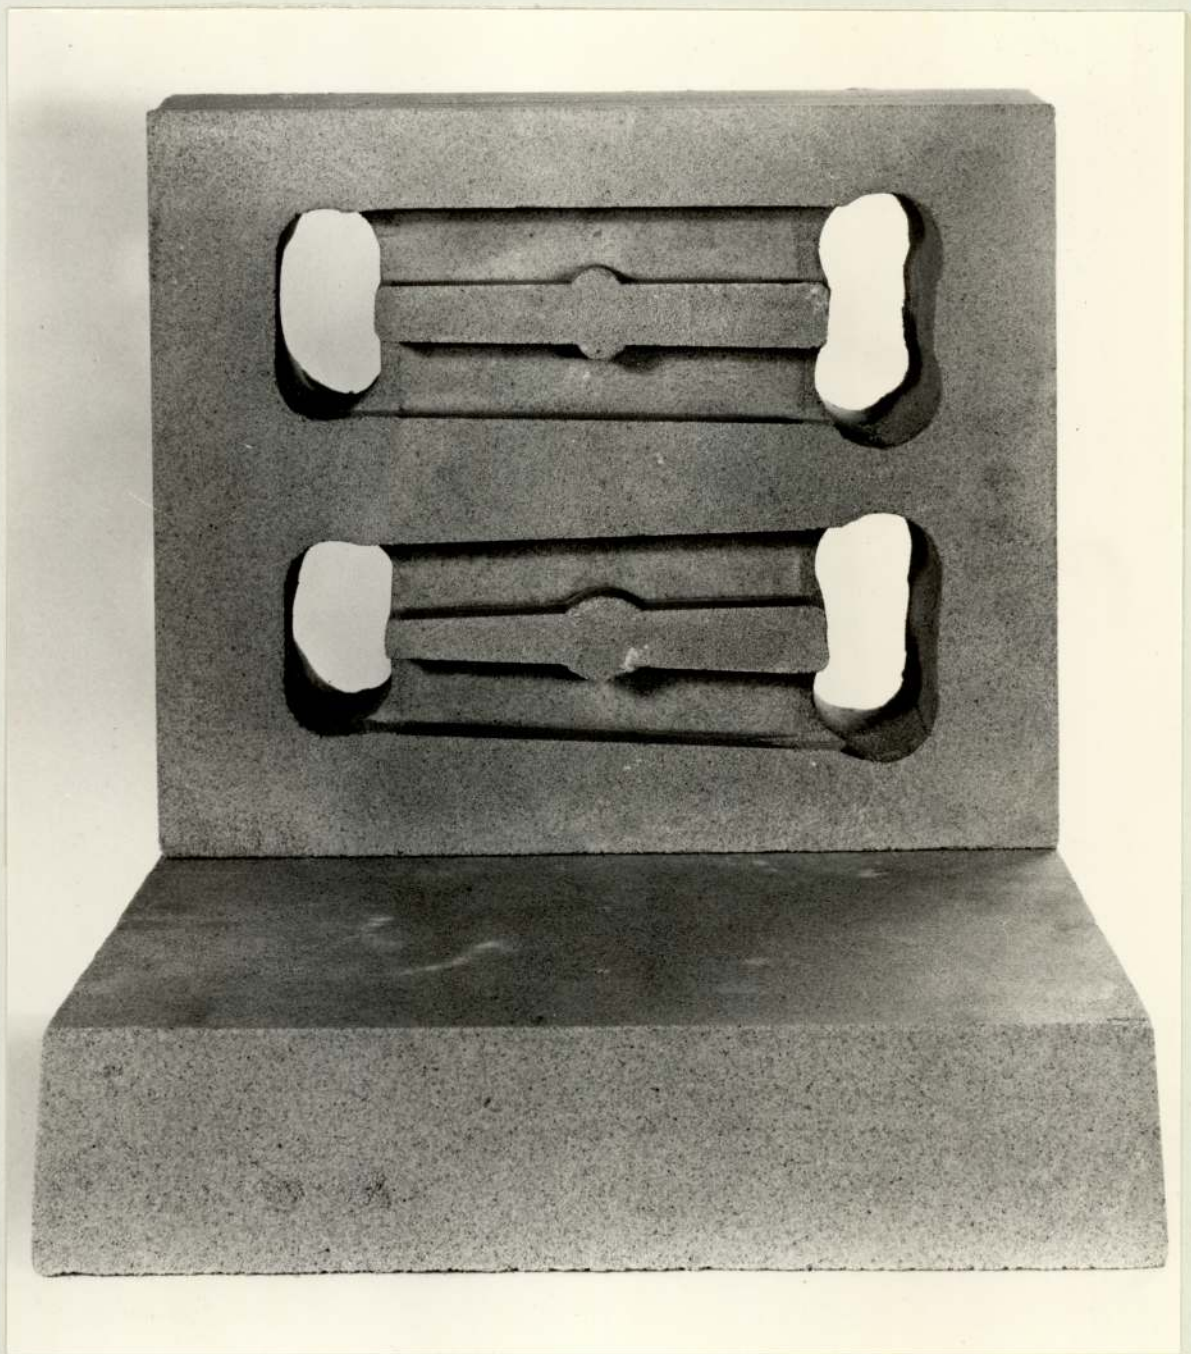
Cast-in Notch Specimen Mould. (x $\frac{1}{3}$).
